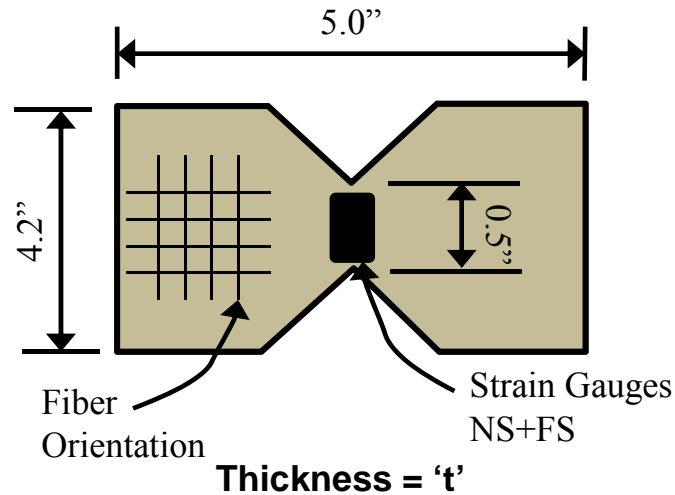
In-Plane Shear Test Specimen Dimensions and Strain Gauge Locations
